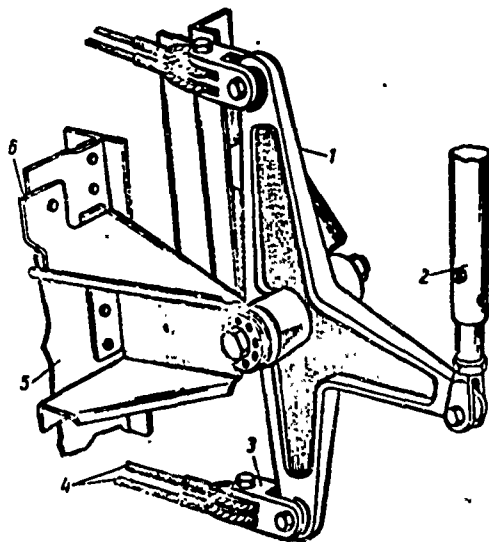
Three-arm actuator of elevator deflection on frame No. 25: 1 - actuator; 2 - rod; 3 - link; 4 - cables; 5 - frame No. 25; 6 - bracket.
